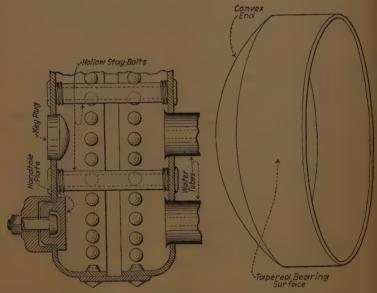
Section of lower part of water- Fig. 69.—The key safety handleg, showing ordinary cast iron and also key handhole plugs in place.
